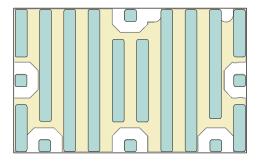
Solder Stencil Overlaid on ACFM-7101 Bottom Metal Pattern.
